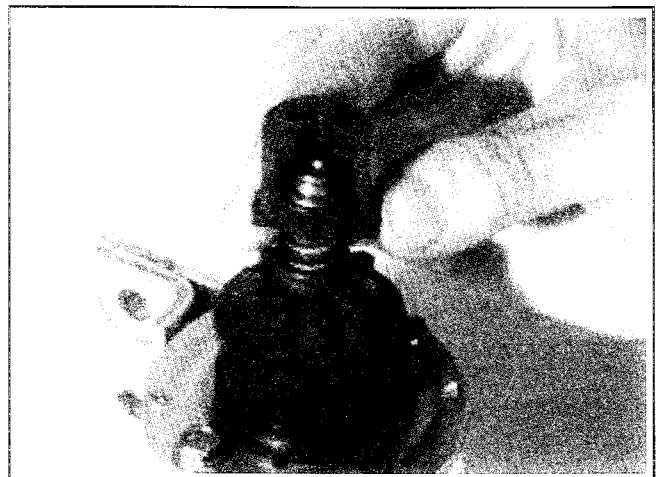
Assembling Larger Inner Half Around Spring Retainer.
